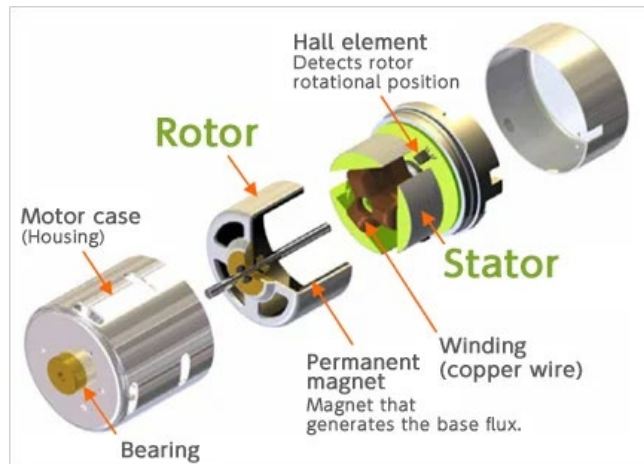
Exploded View of Brushless Motor Assembly. Source: Nidec Corporation (n.d.).
